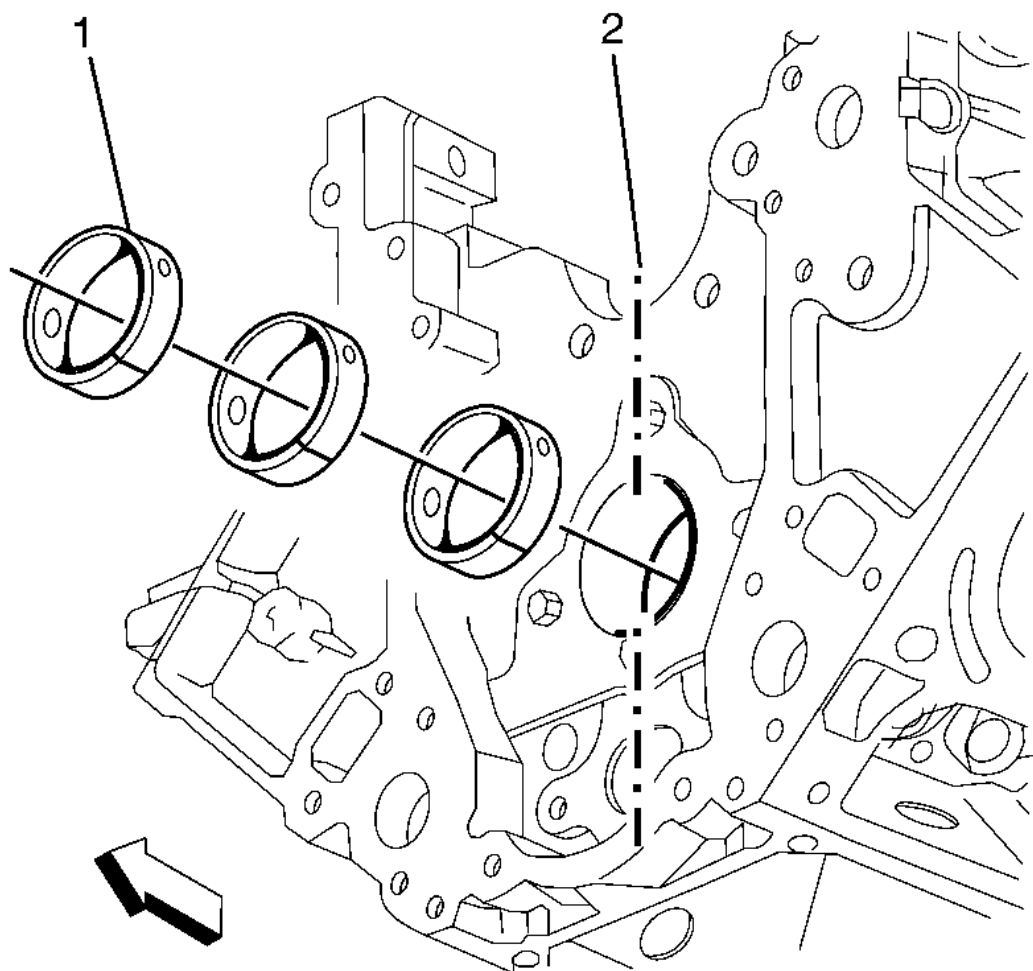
Identifying Camshaft Bearing & Cylinder Block Centerline
